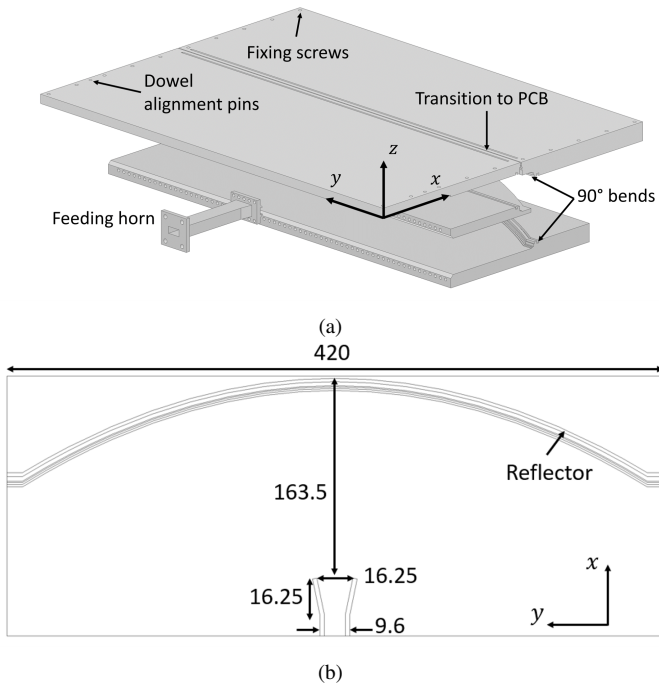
Geometry and dimensions of the pillbox beamformer. All dimensions are in millimeters. (a) Exploded view. (b) Schematic view.
